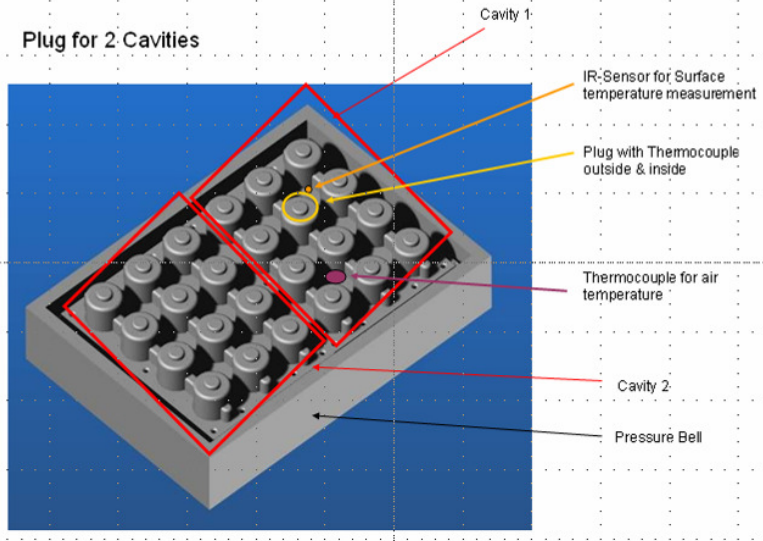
Drawing of the plug of the test mould at Jacob Kunststofftechnik
